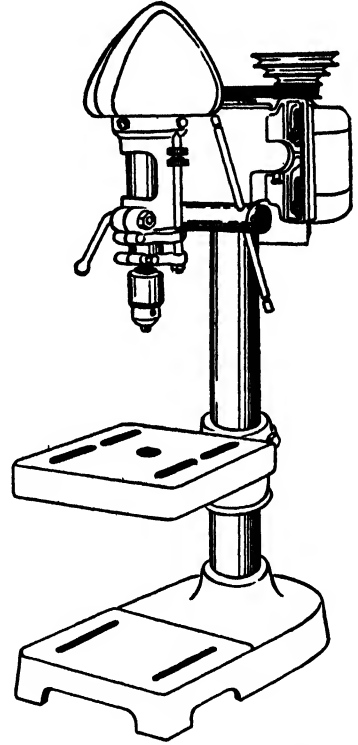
The drill press is a preferred drilling machine for general use inside the shop.
